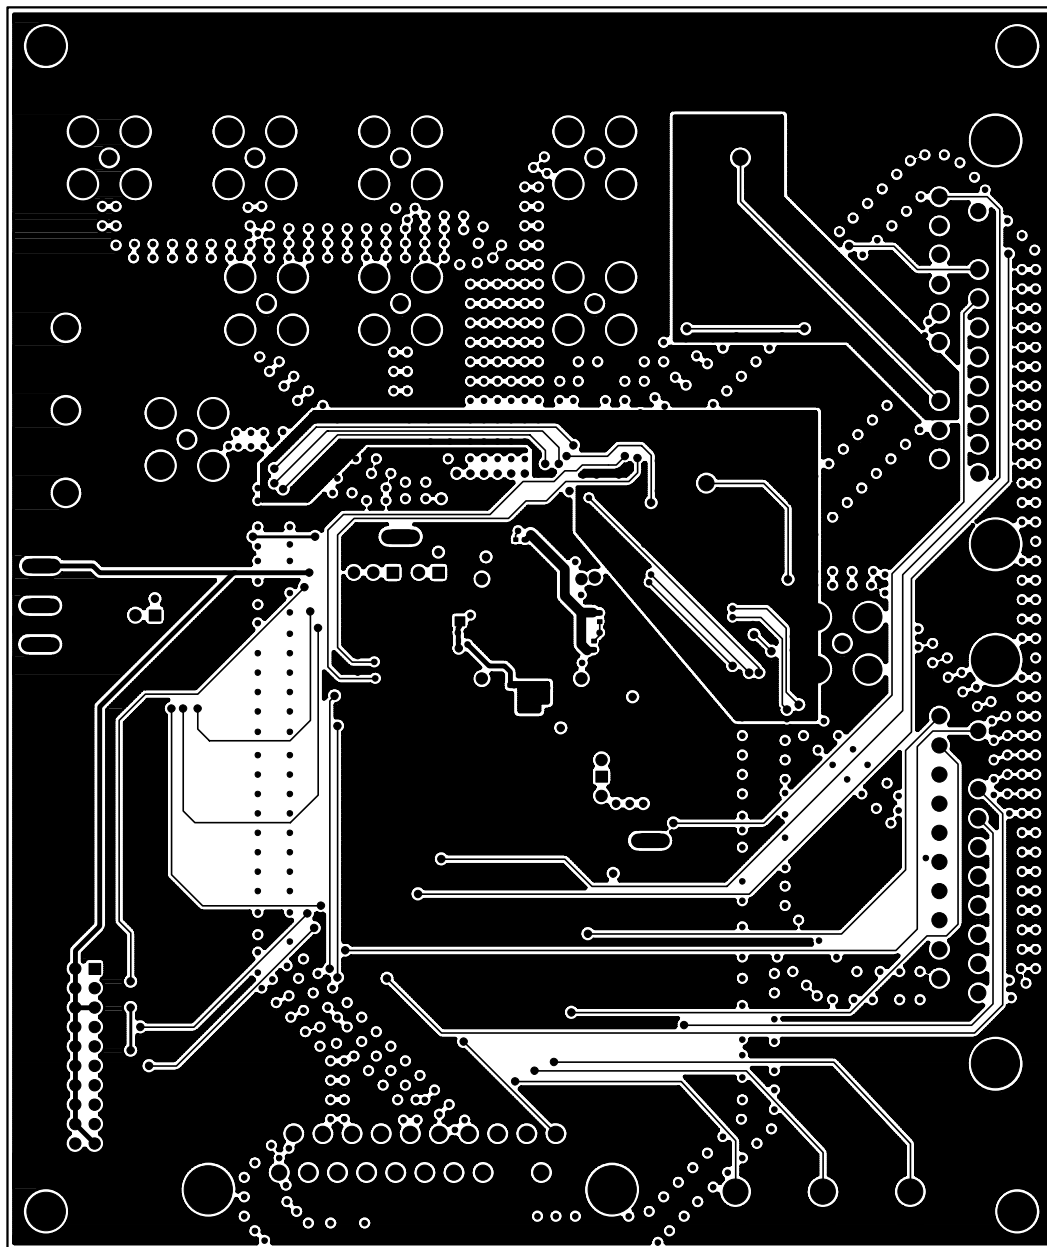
MAX4399 EV Kit PC Board Layout—Solder Side
